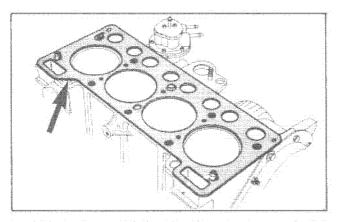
Head gasket fitting/identification (arrowed) - 847
